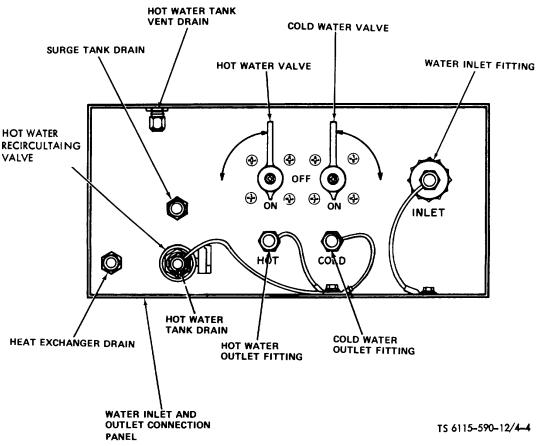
Water Inlet and Outlet Connection Panel (TS 6115-590-12/4-4).
